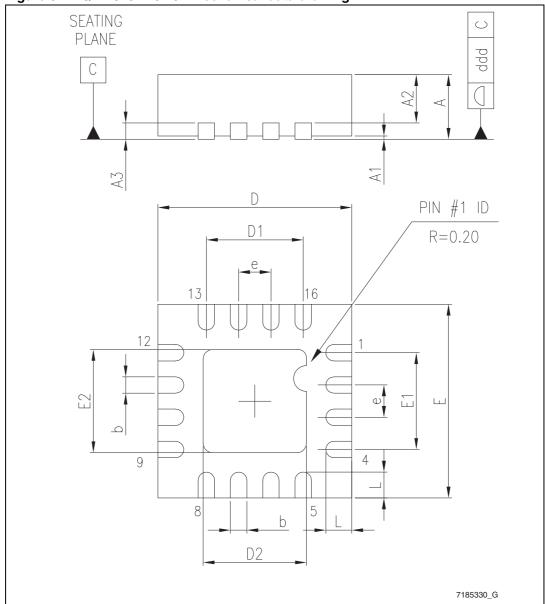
QFN 3x3x1.0 16L mechanical data drawing
